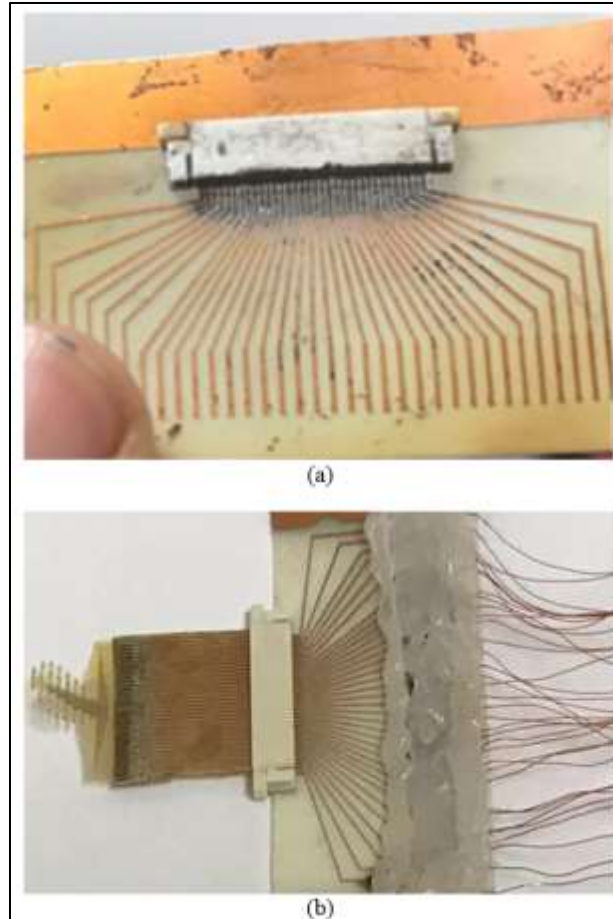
Interfacing of 34-channel electrode via a Kapton film to connector and subsequent soldered wires. (a) Soldered connector with PCB, (b) All the interfaces
